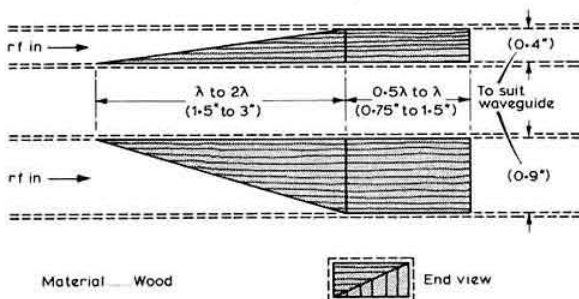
The design of a waveguide tapered dummy load. Dimensions in brackets for WG16 (10GHz)
